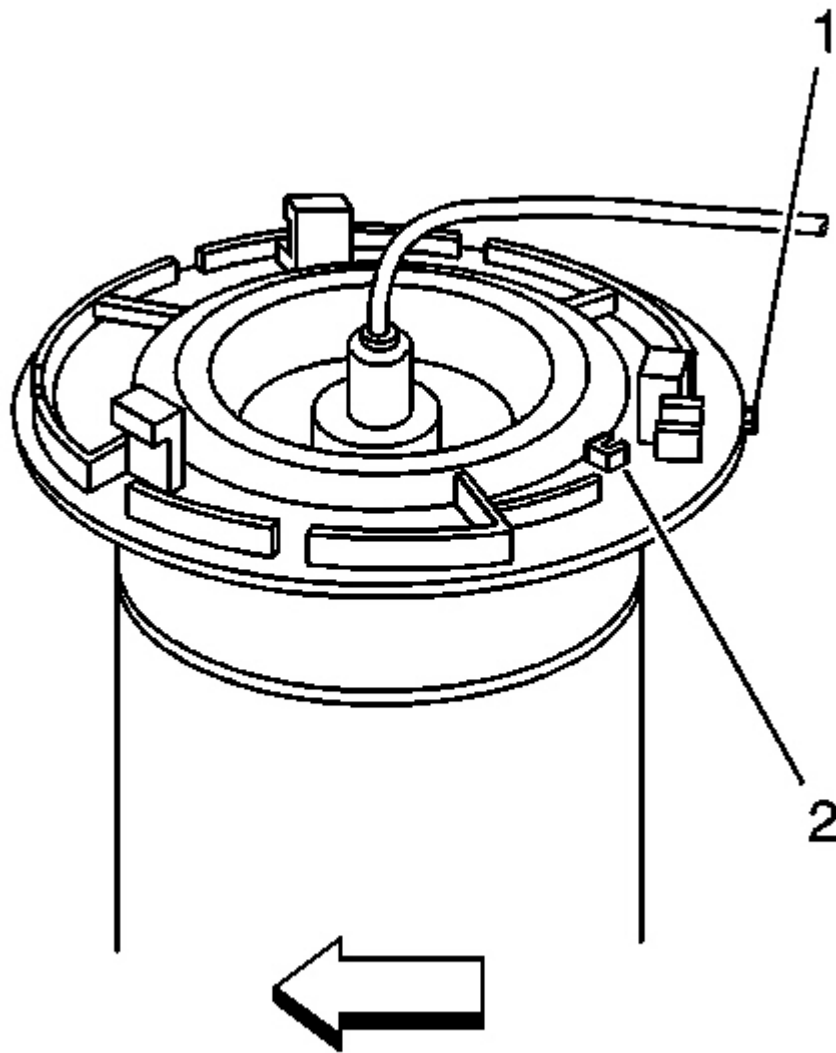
Locating Anti-rotation Peg In Air Spring Top Plate
